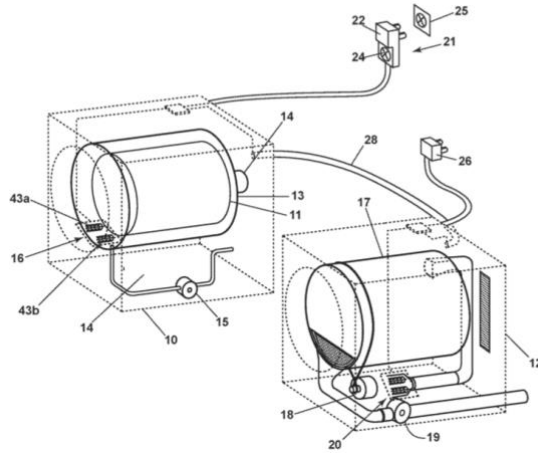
A schematic three-dimensional view of a combined washing machine and dryer.
